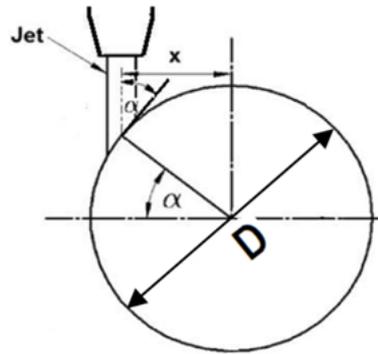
Jet impact angle (α) on circumference of workpiece.
